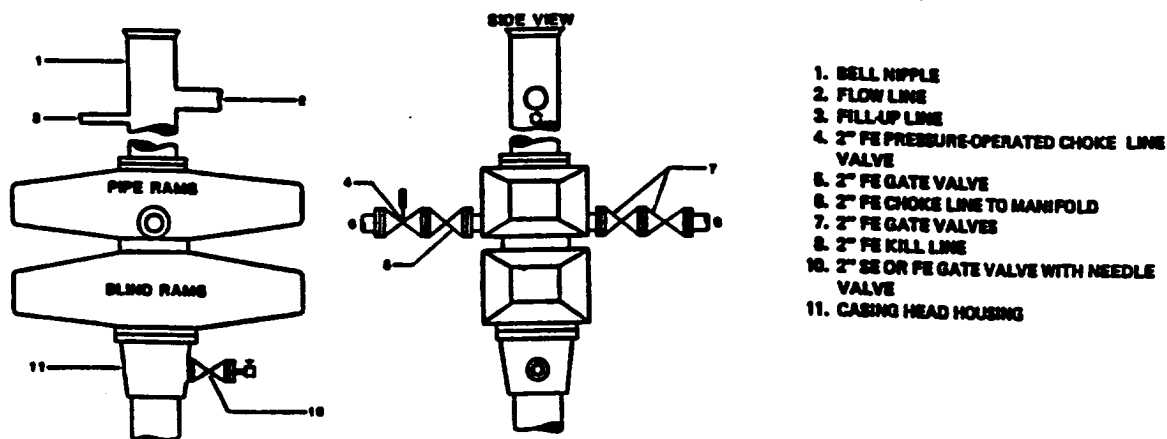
Standard Hydraulic Blowout Preventer Assembly
